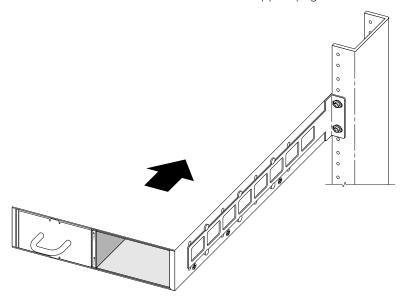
Sliding the Switch onto the Rear Mounting Brackets
